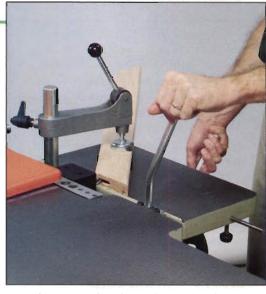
Photo D: Two long but unobtrusive handles guide the mortising table front to back and side to side. The workpiece clamp is borrowed from the tablesaw.
